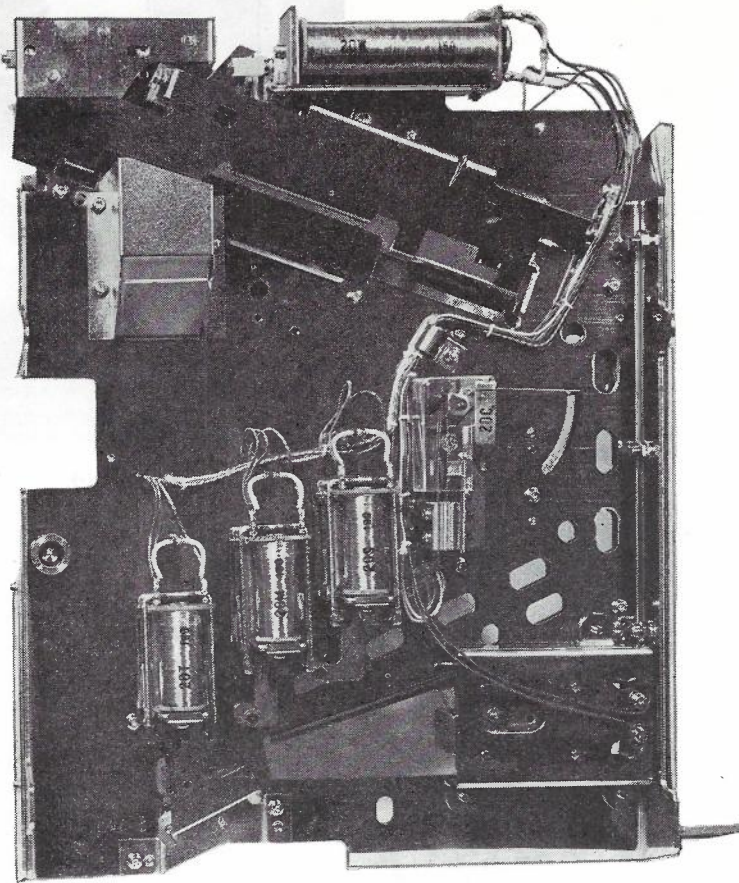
Rear View of the 20 Cent Coin Mechanism.
